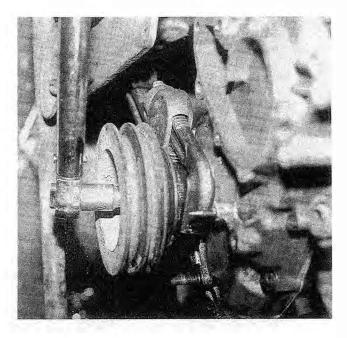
Vibration damper secured with wrench while mounting nut is tightened.
